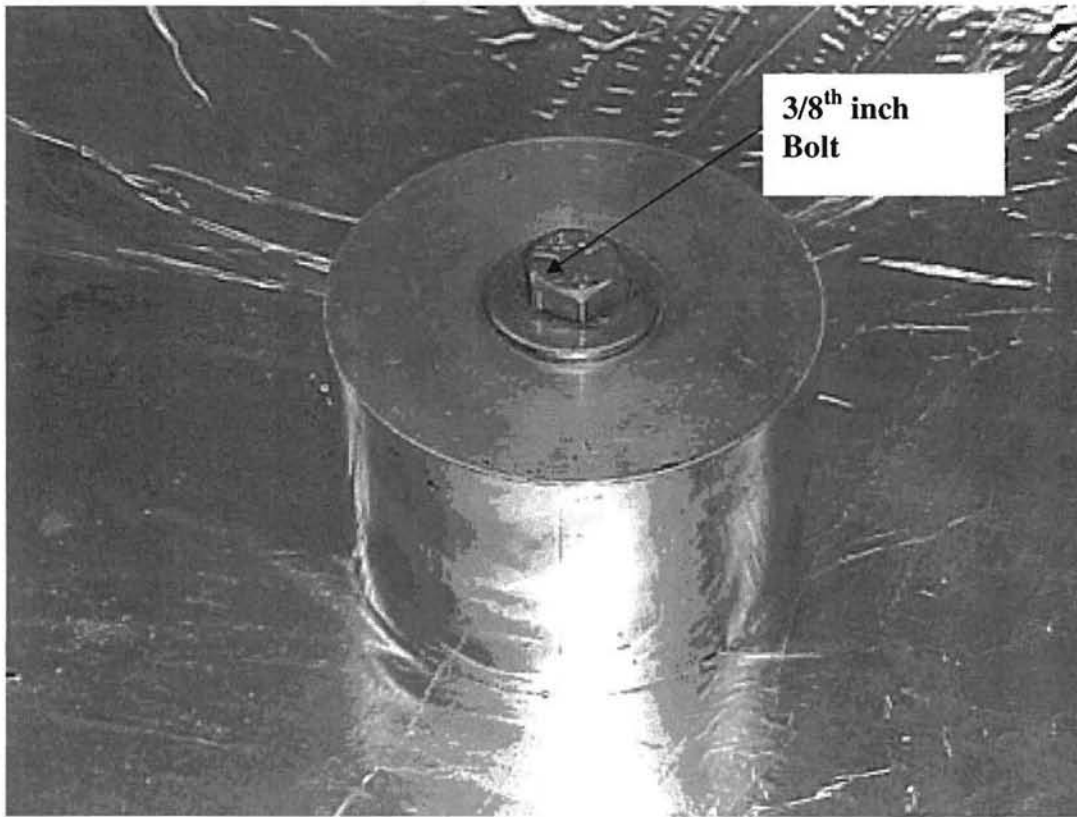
Aluminum Test Cylinders for UTEP Torque Test
